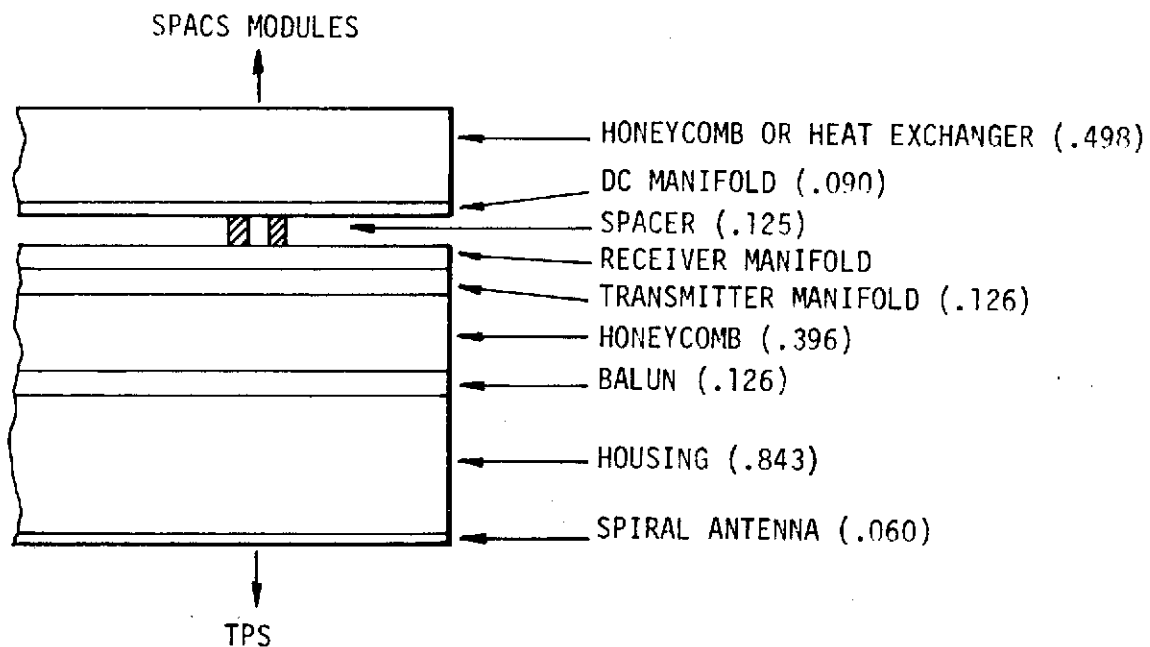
SPACS I Circuit Board Assembly Configuration
